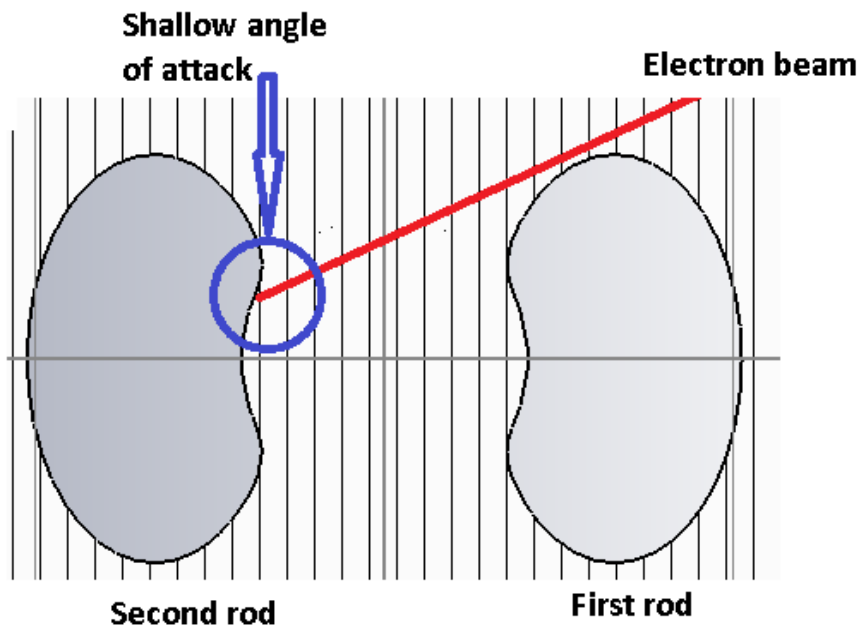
The shallow angle of attack that the second rod weld will experience after the first rod is welded in place.
